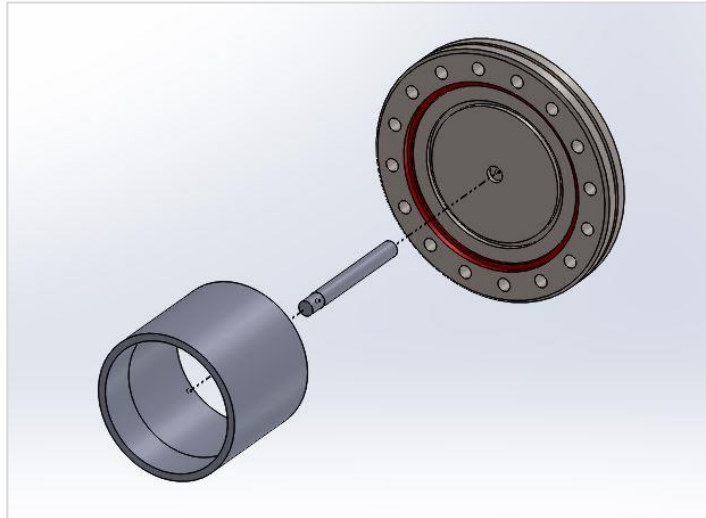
Welding Sub-Assembly with the pump housing anchor and static shaft
